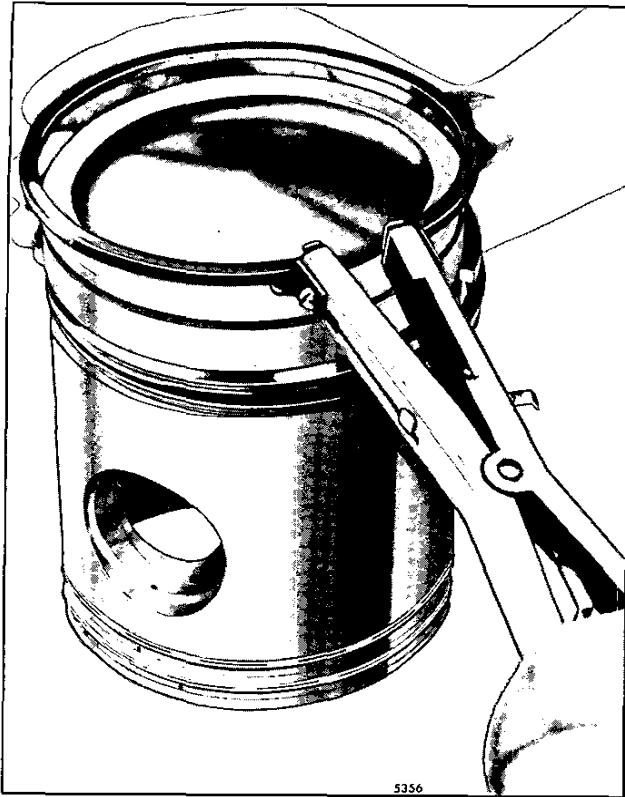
Removing or Installing Piston Rings with Tool J 8128
